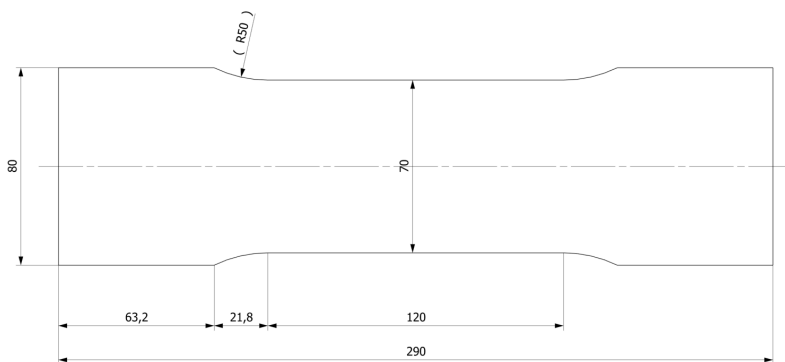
Specimen for DIC tensile testing of sheets laser pattern.
